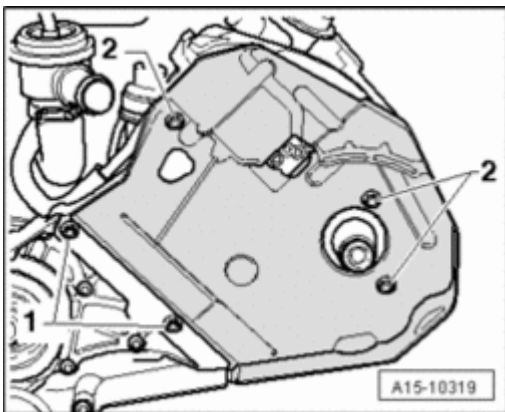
Removing Bolts And Toothed Belt Guard At Rear
